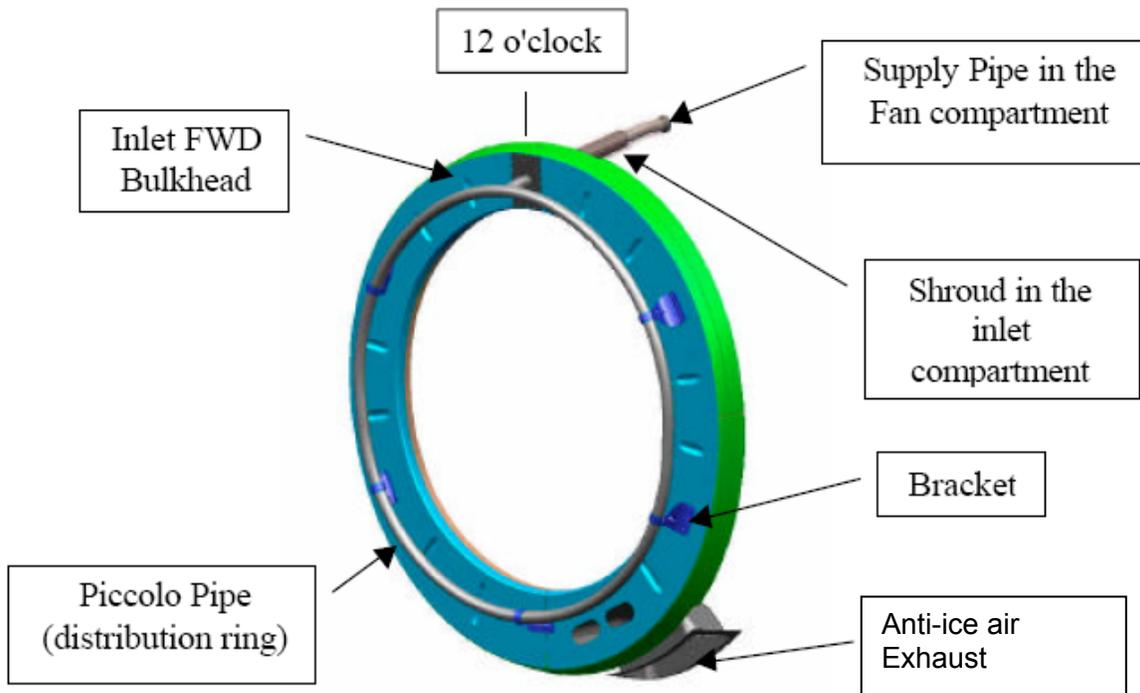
3-15-01 - SUPPLY PIPE AND PICCOLO PIPE INSTALLATION
